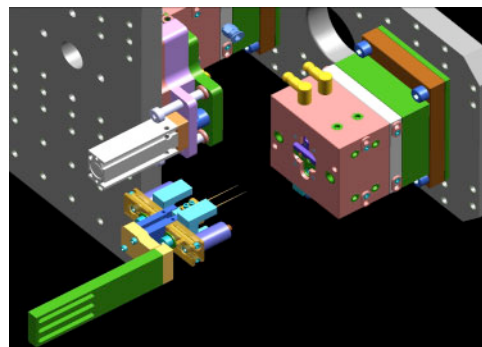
View of the mould design showing robot head (bottom left) removing two of the moulded 'smartpoint' cores.
